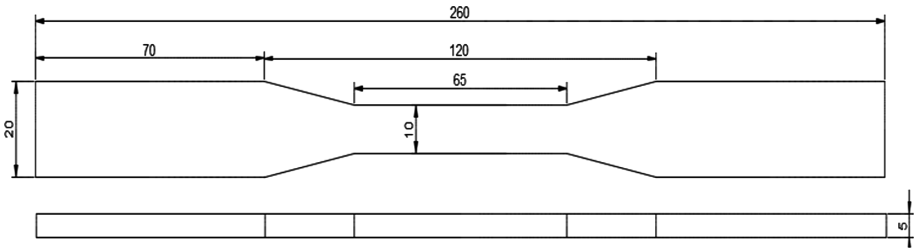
Standard specimen dimensions for tensile test [dimensions are given in mm]
